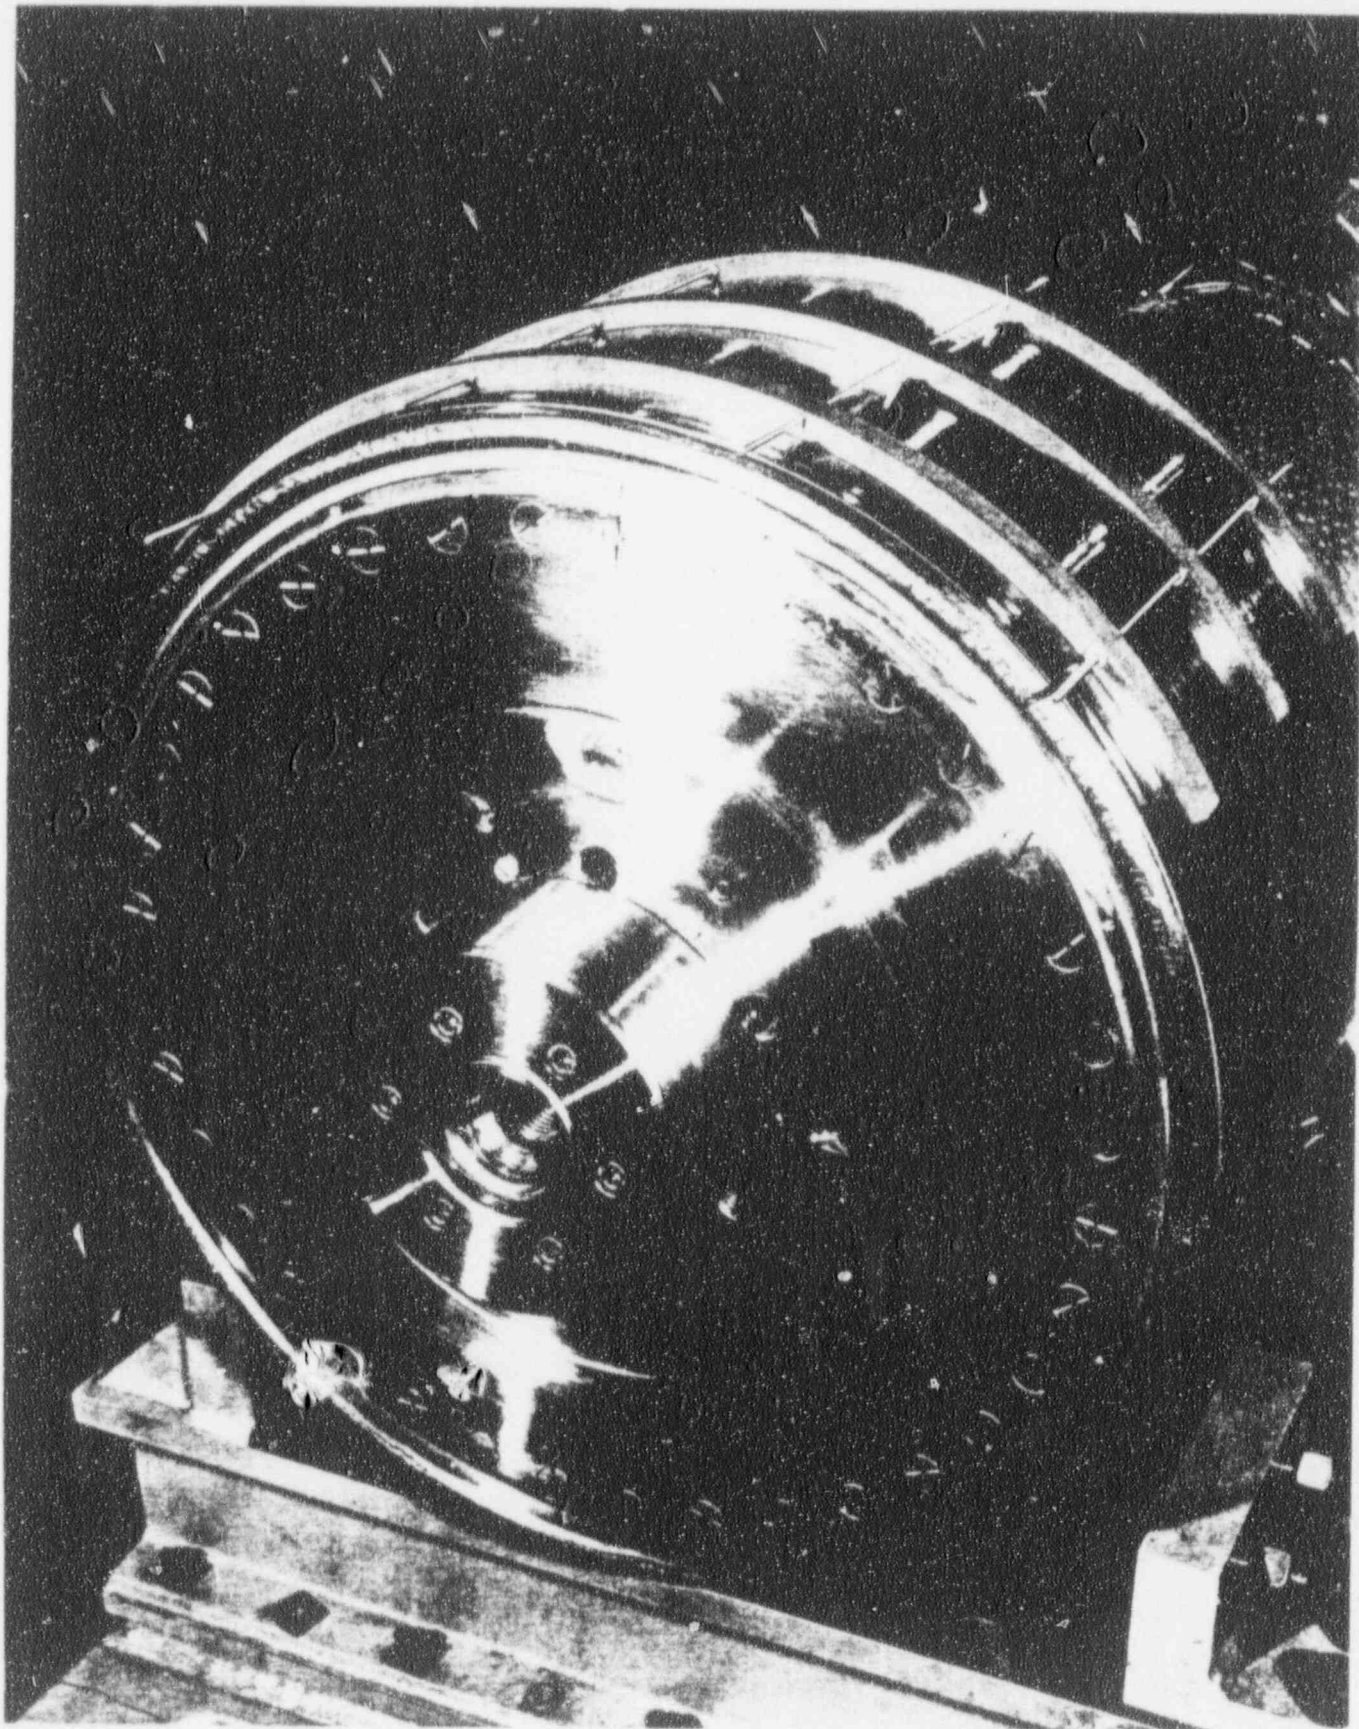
Test rotor with Micarta spacer for transporting the rotor/housing assembly to the test facility.
